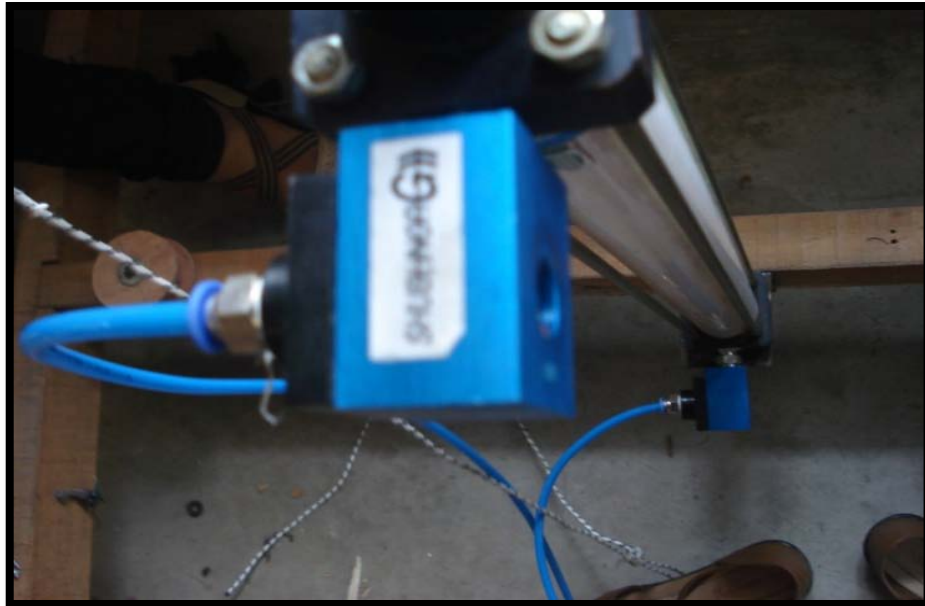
The Quick Exhaust Valve fitted to the Cylinder.
